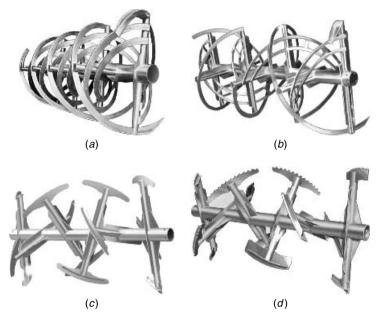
Four convective blender impellers: (*a*) double ribbon agitator; (*b*) center-discharge ribbon agitator; (*c*) paddle agitator; (*d*) sawtooth paddle agitator. (Courtesy of H.C. Davis Sons Manufacturing Co., Inc., Bonner Springs, KS, printed with permission.)
